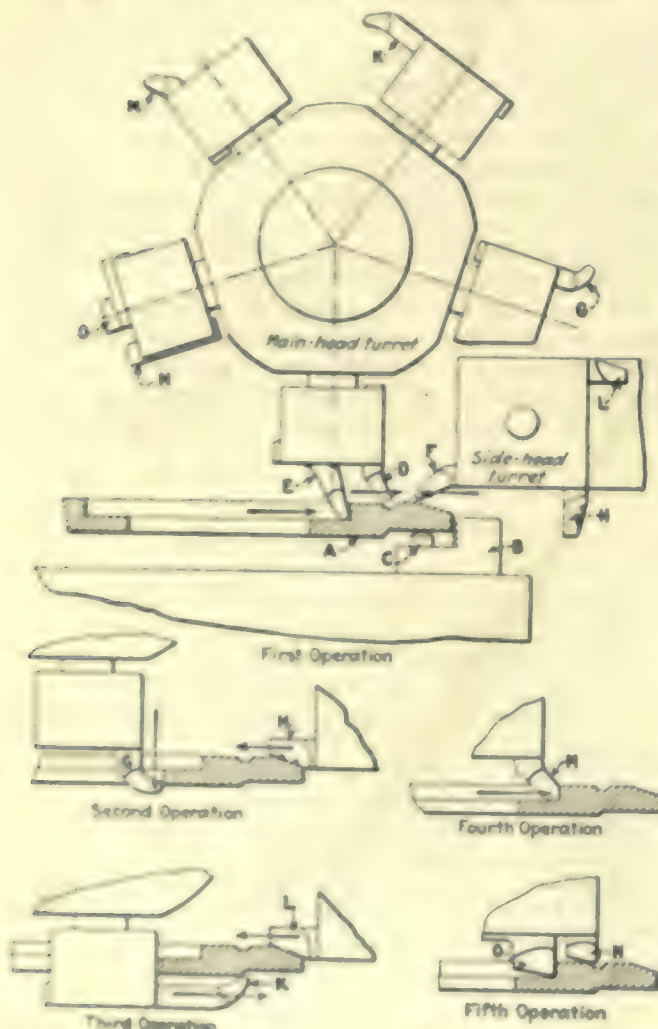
TOOL LAYOUT FOR FIRST SETTING OF CAST-IRON DISK ON VERTICAL TURRET LATHE
